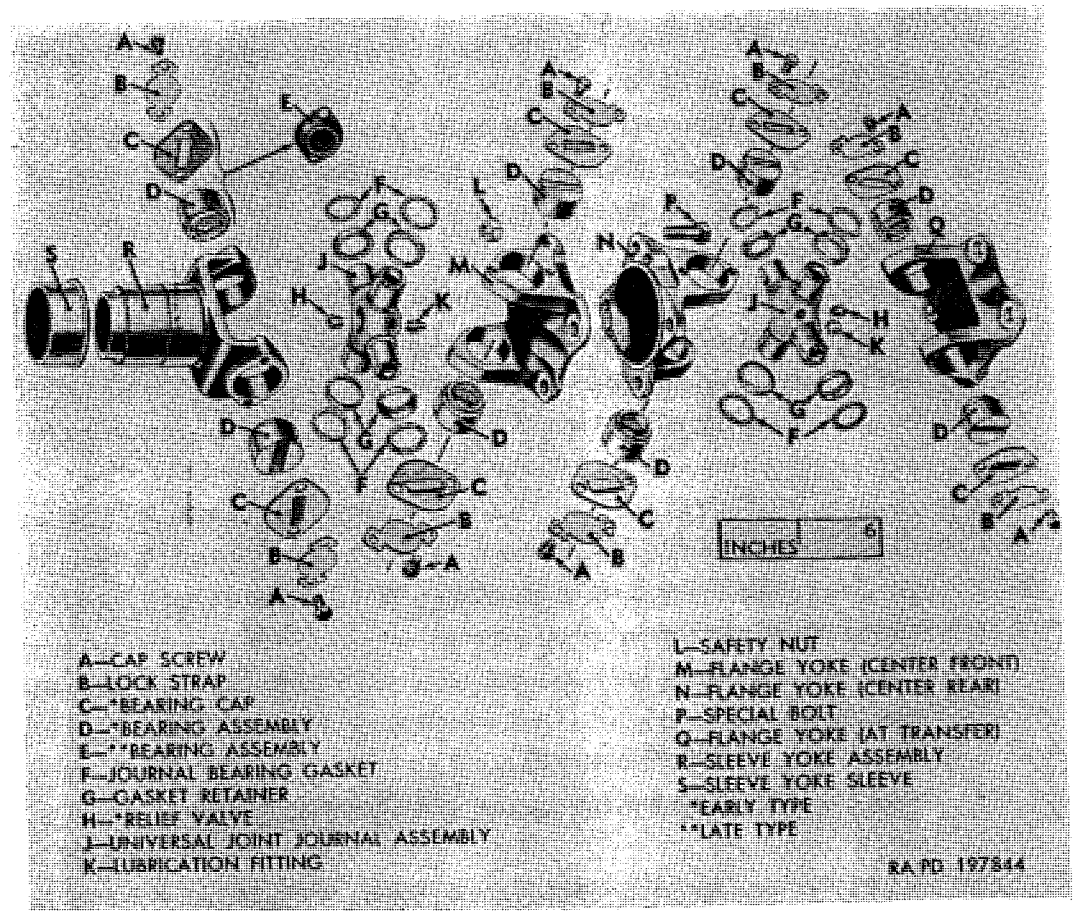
Transmission-to-transfer propeller shaft universal joint components.
